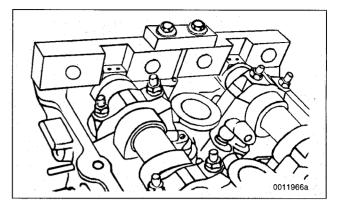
BMW special tool no. 11 3 240 installed on rear of carnshafts to position carnshafts at TDC. (M44 carnshafts shown. Other engines are similar.)
